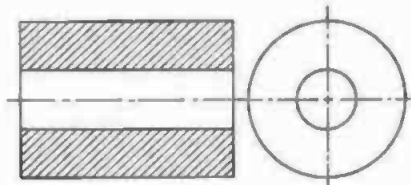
Cross-sectional view of a typical ferrite bead.
